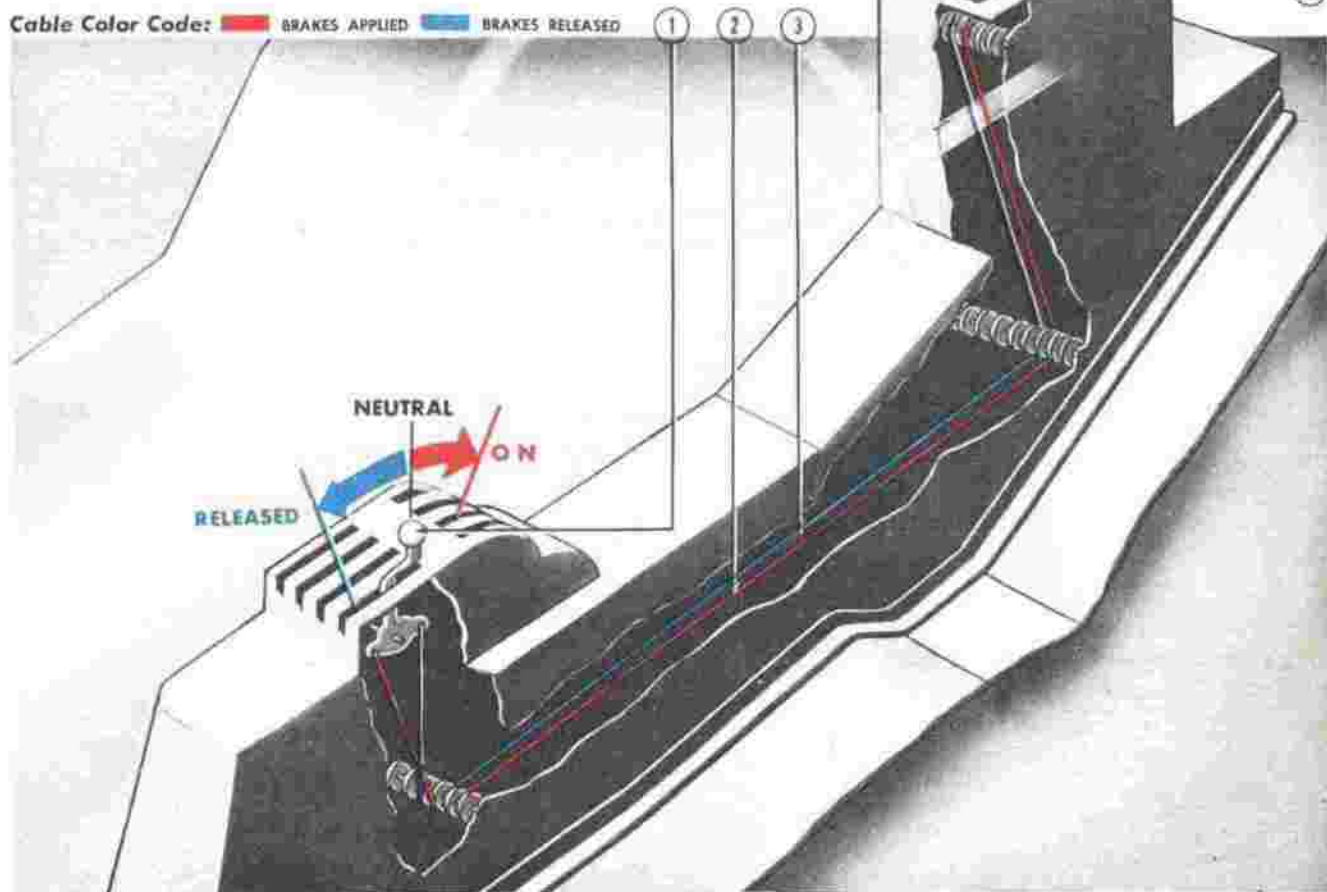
Brake Emergency Air Control Valve Cable Control System
